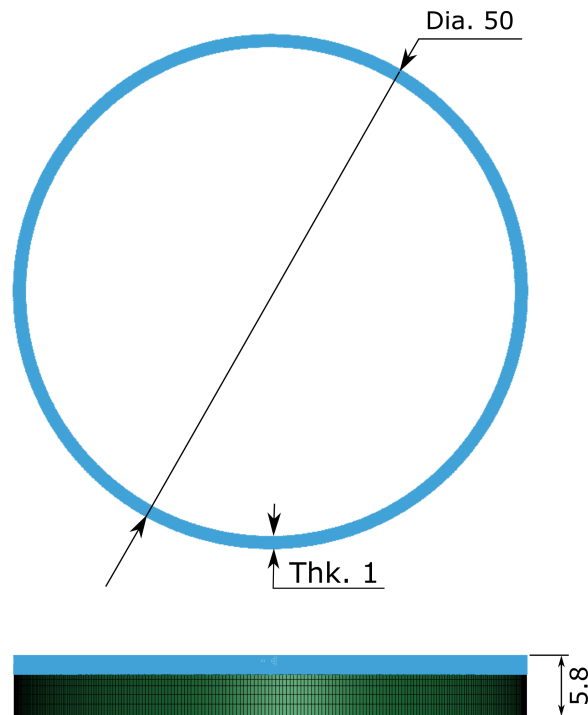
Geometry of the workpiece used in machine dynamics model.
